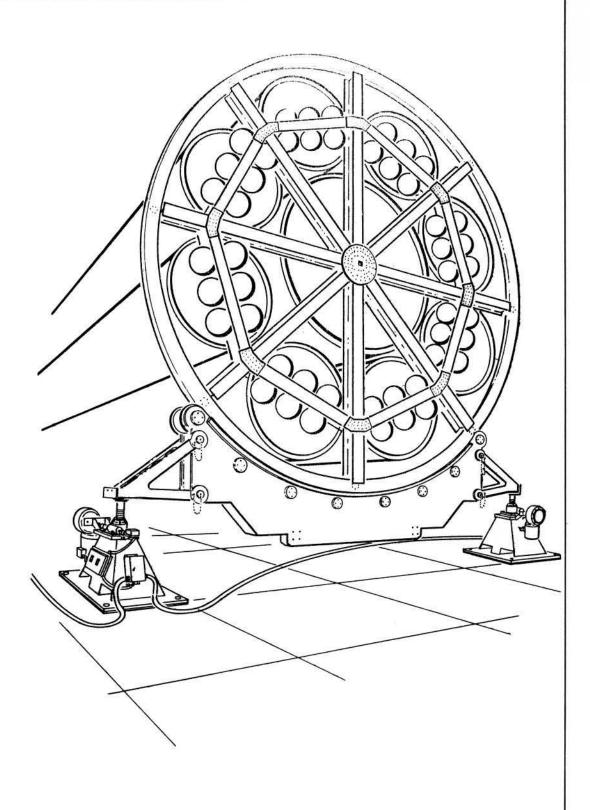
FIXTURE ASSEMBLY SUPPORTED BY JACK ASSEMBLIES
